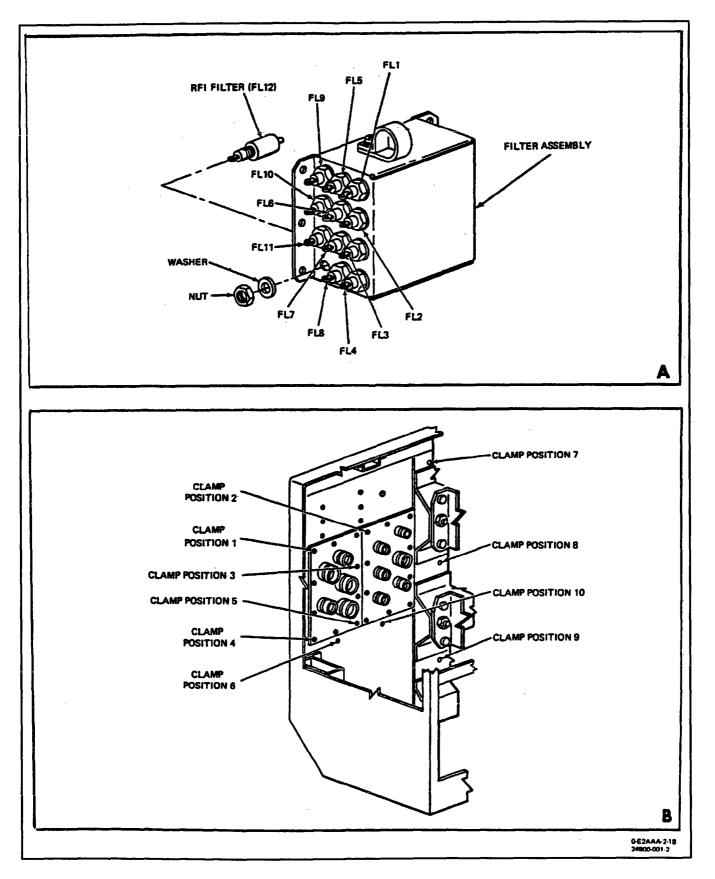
Removal and Installation of Cable Assembly Set and RFI Filter (Sheet 2)
